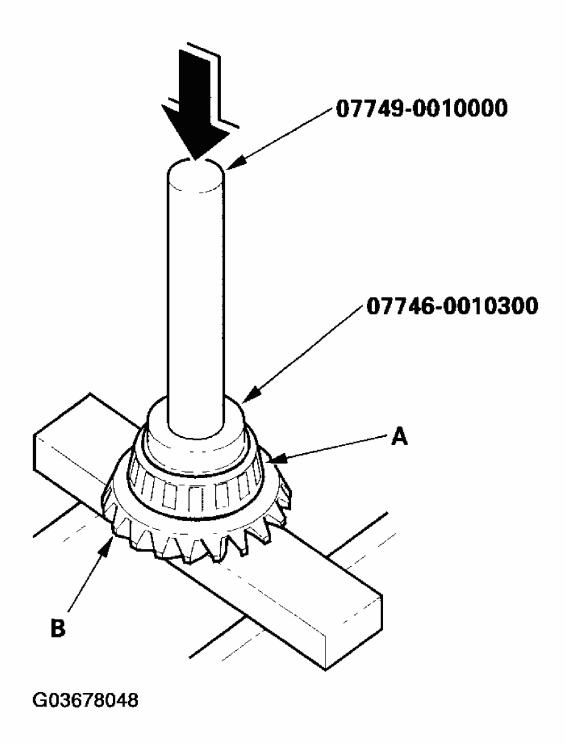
Installing Tapered Roller Bearing On Transfer Drive Gear Courtesy of AMERICAN HONDA MOTOR CO., INC.
